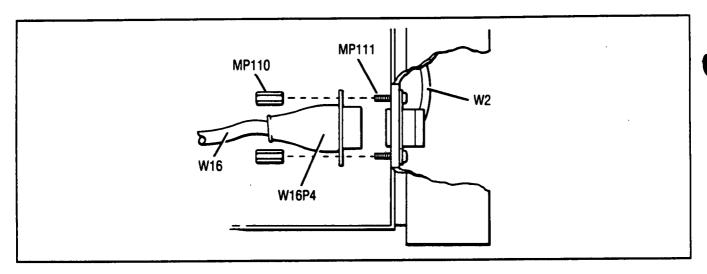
P/O A10/A11 Assembly Service Positioning
